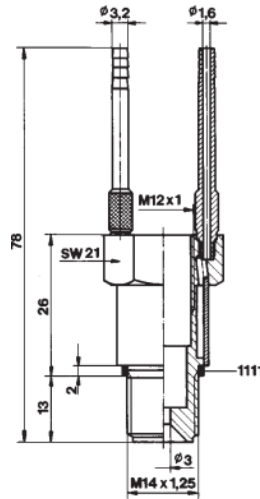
Kistler 7075 Drawing (Taken from [19])
